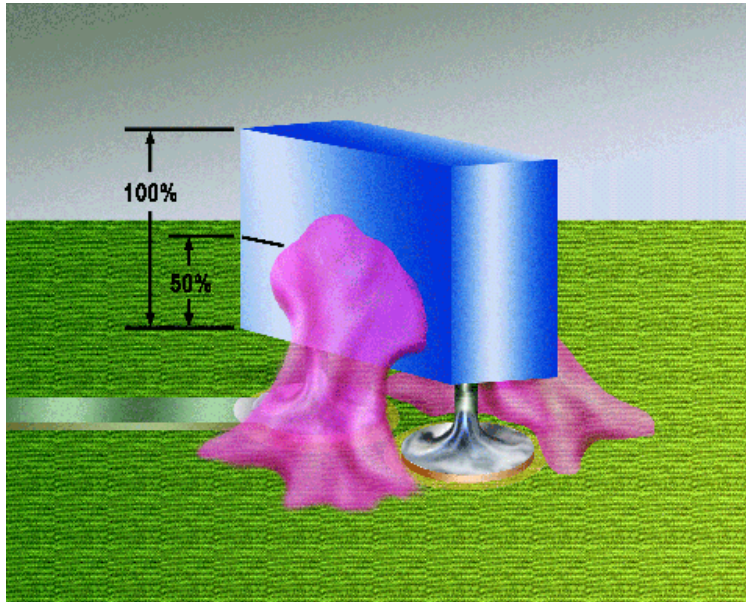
Default Staking for Horizontally-Mounted Sleeveless Cylindrical Part
